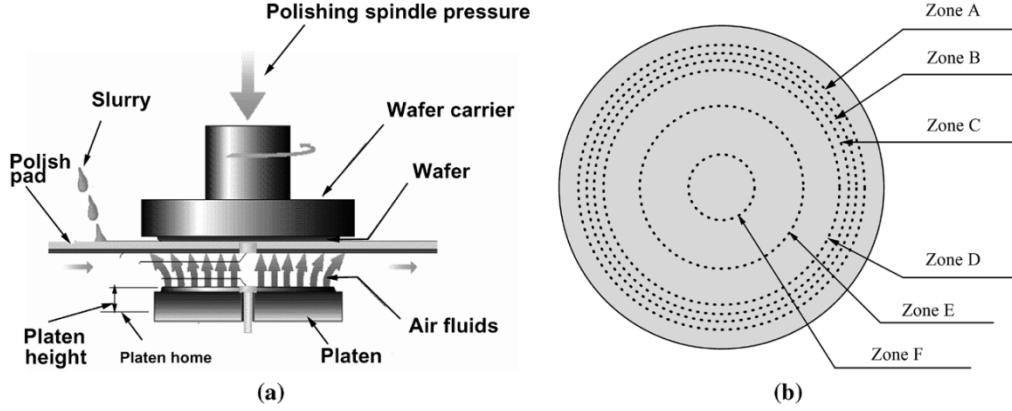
LPT air-bearing systems. (a) Polishing platen assembly. (b) Platen air zones.
